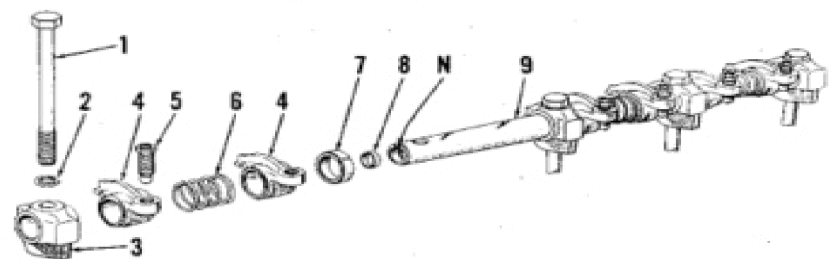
Exploded view of rocker arm assembly. Cylinder head bolts (1) are used to retain the rocker arm supports. Notch (N) in end of shaft must be installed upward and to front of engine. Refer to note in text concerning washers (2).
